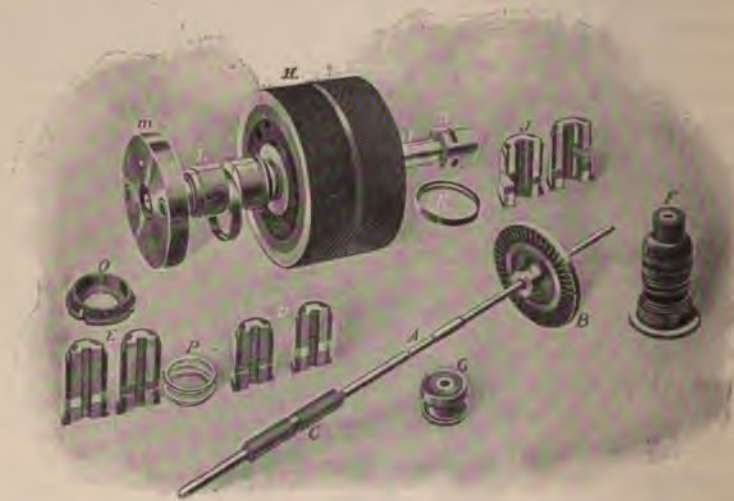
WORKING PARTS OF THE DE LAVAL STEAM TURBINE
